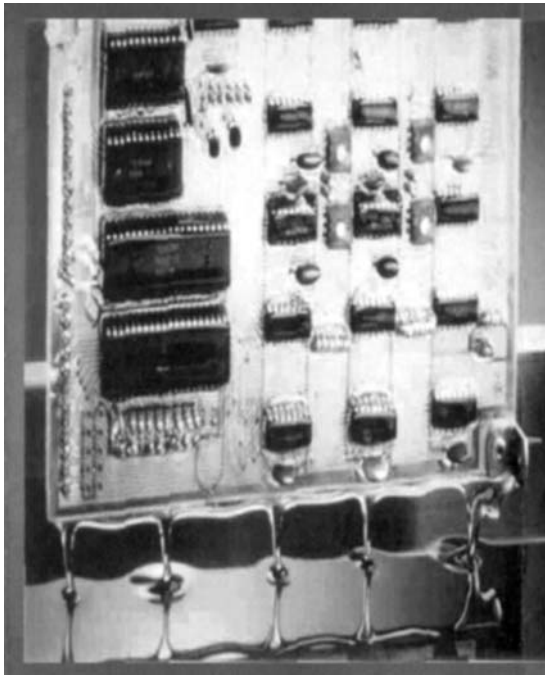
Printed circuit board assembly dip coated with silicone. (*Courtesy Dow Corning.*)
